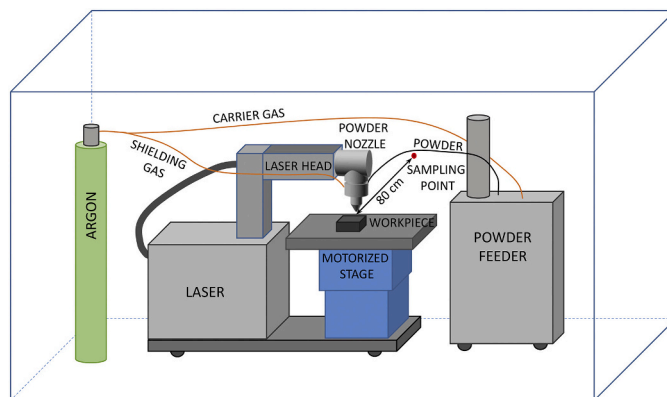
Schematic diagram of the LRS EVO-Diodeline 450 based open table additive manufacturing machine.
